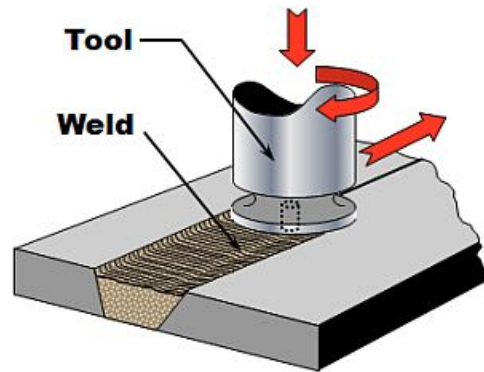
Schematic diagram of the Friction Stir welding Process [3]
